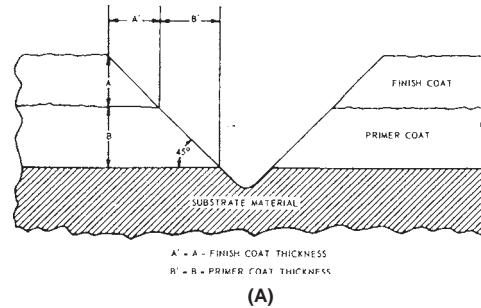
Tooke Inspection Gage<sup>3</sup>
